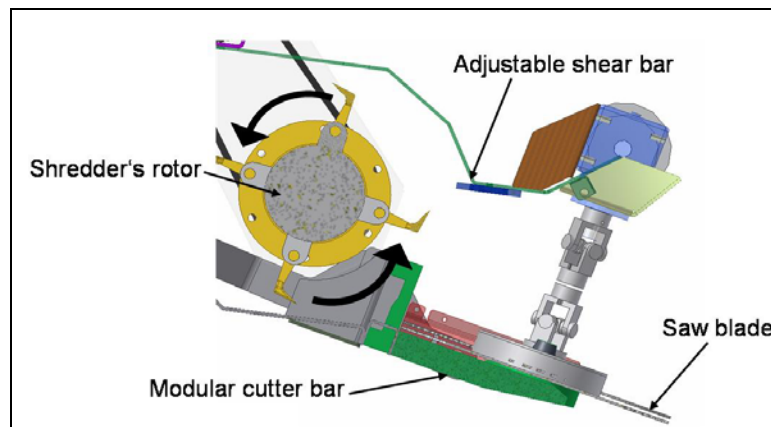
Cross-section of cutting and shredding mechanisms.¹
